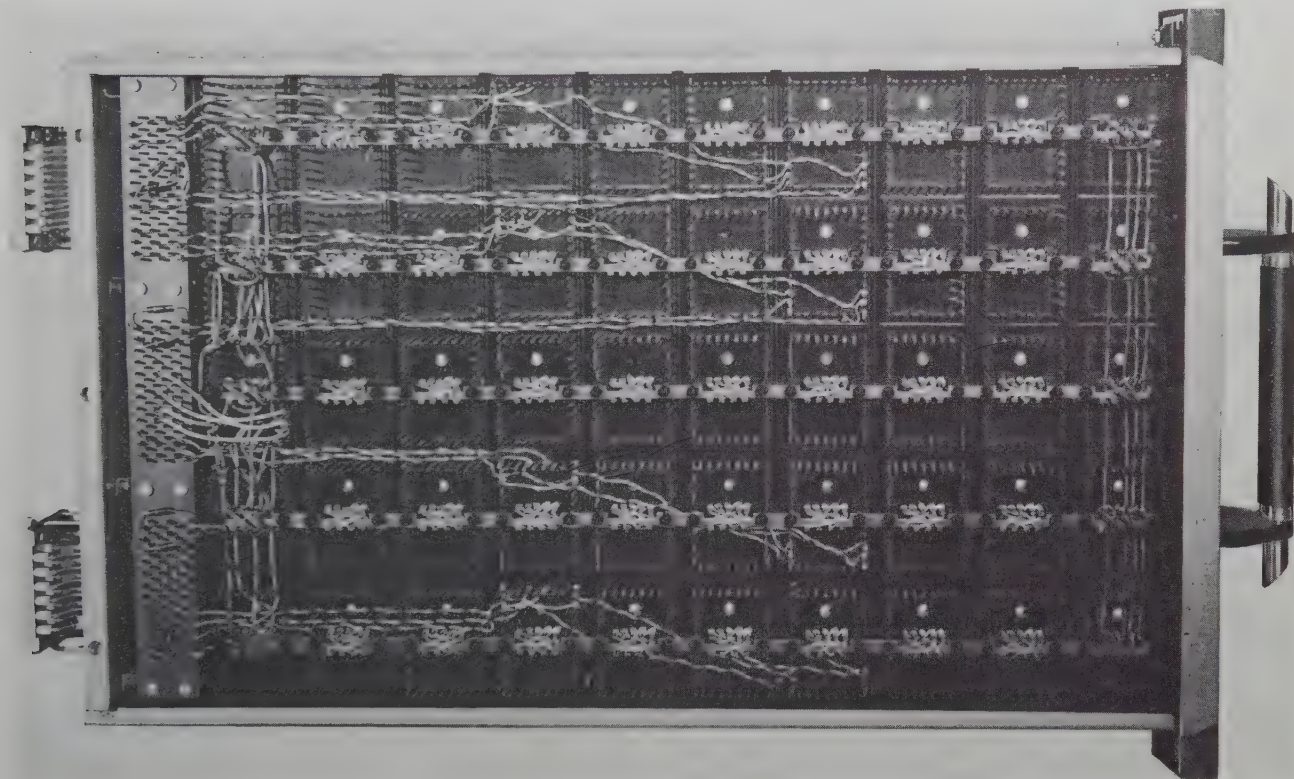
Pluggable unit assembly, rear view showing wiring.
